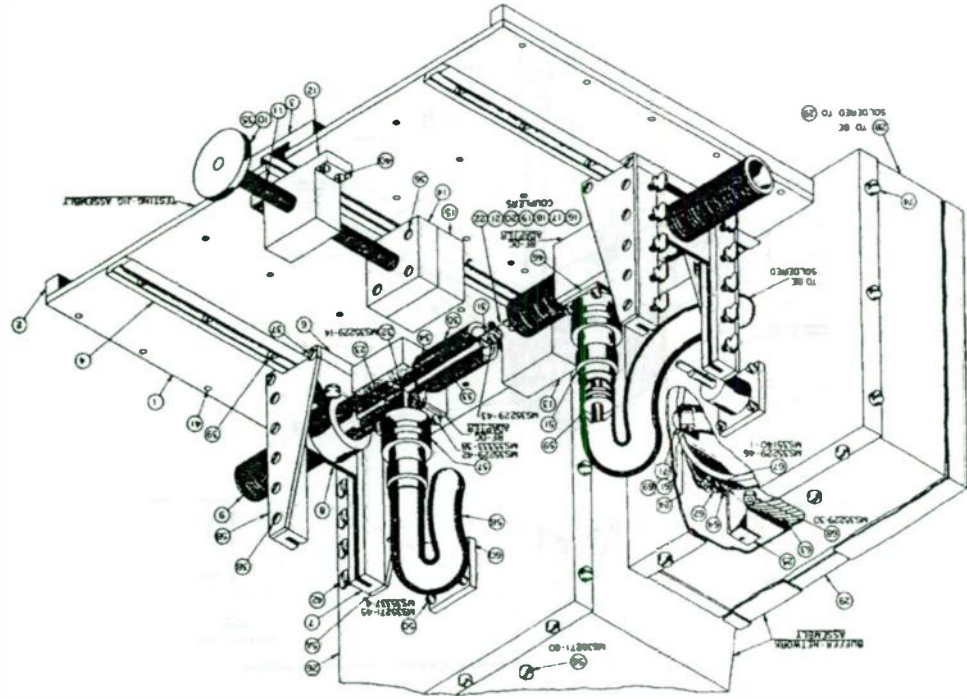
RF De-modulator — loss measuring equipment assembly.
